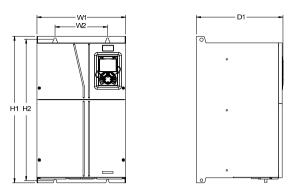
Wall-mounting diagram of inverters of 380 V, 90 to 110 kW
